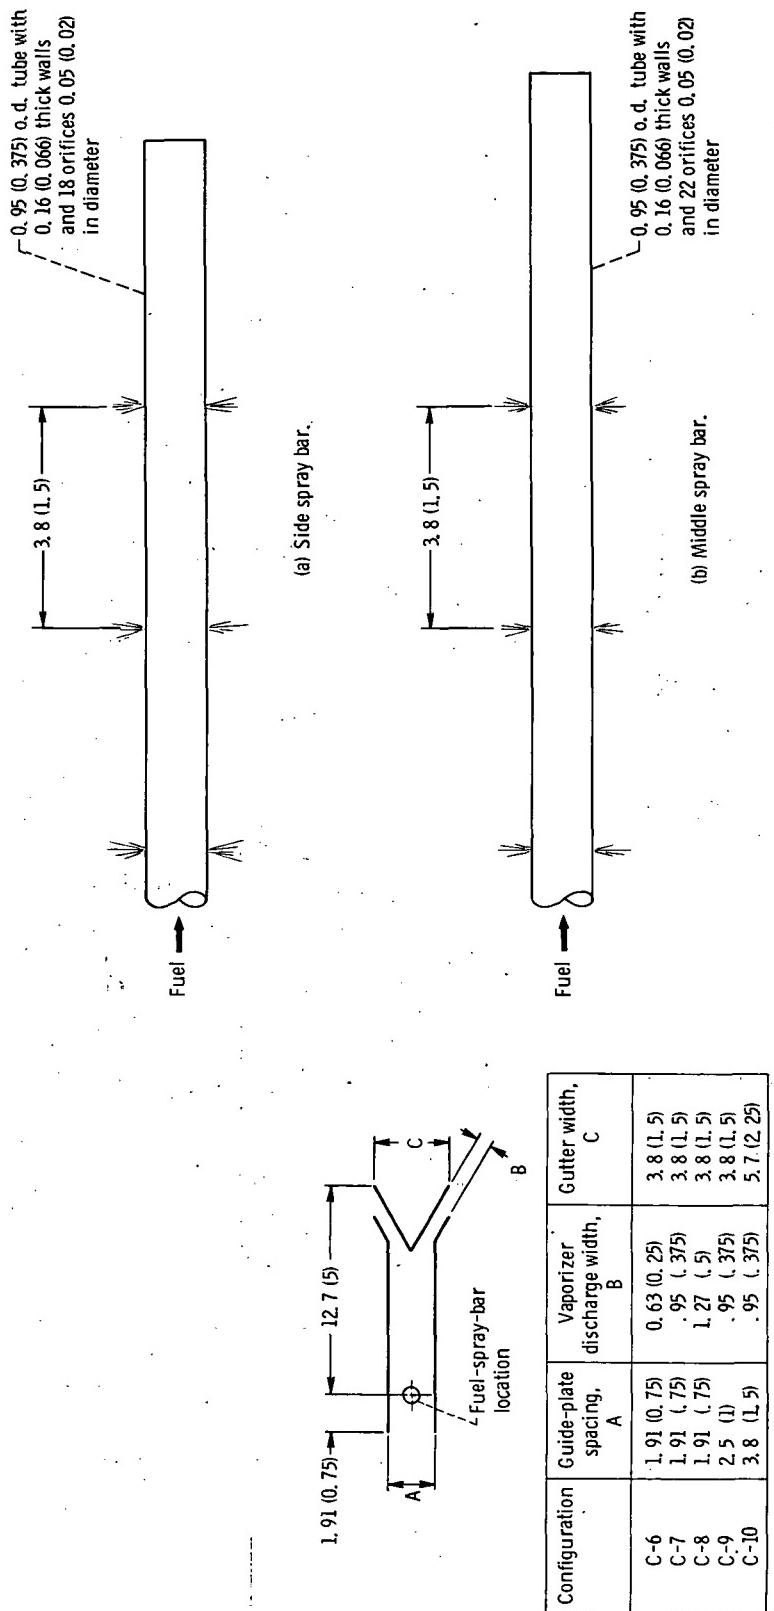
Cross-sectional sketch and dimensions of film-vaporizing designs. Included angle of gutter is 60°.
